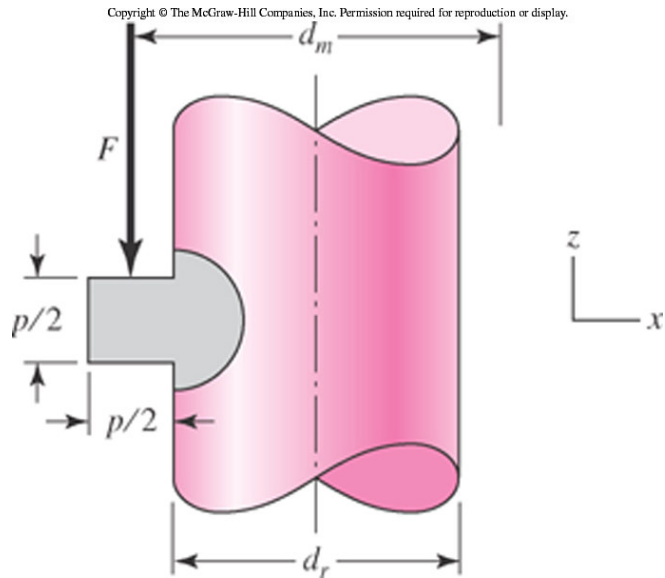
Geometry of square thread in finding bending and transverse shear stress at the thread root
